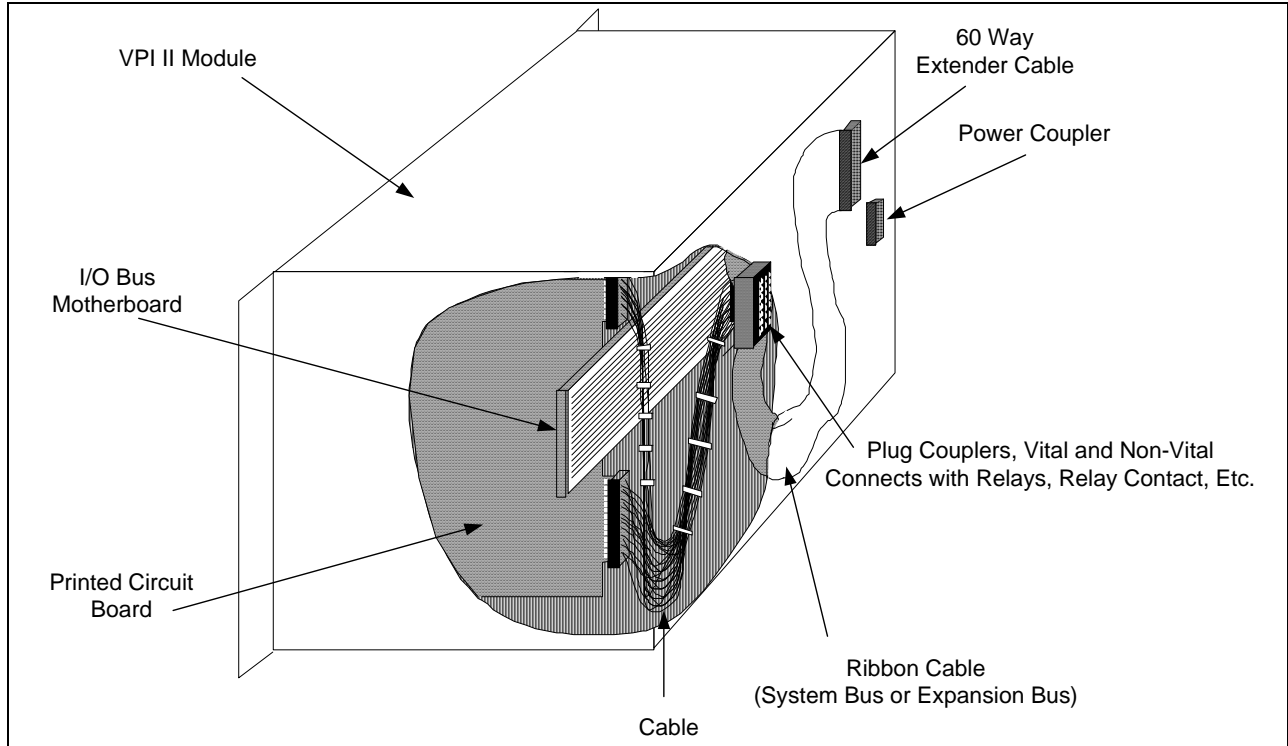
Typical Module Rear Panel Wiring with Plug Coupled Chassis
